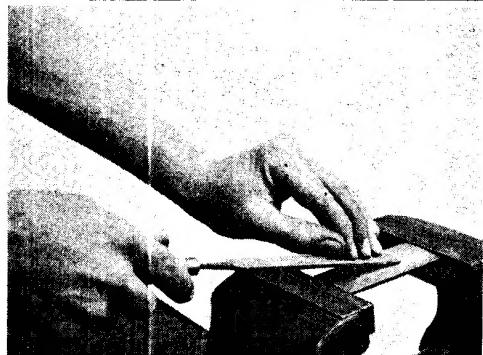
One way to remove a defect or high place on the surface is illustrated. This is known as local filing
